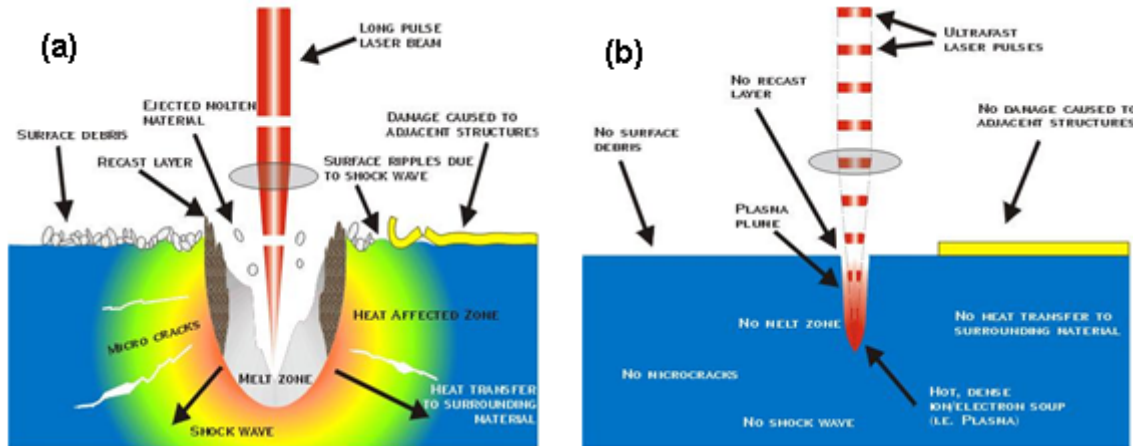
(a) Machining with longer pulses, and (b) machining with shorter pulses [27].
